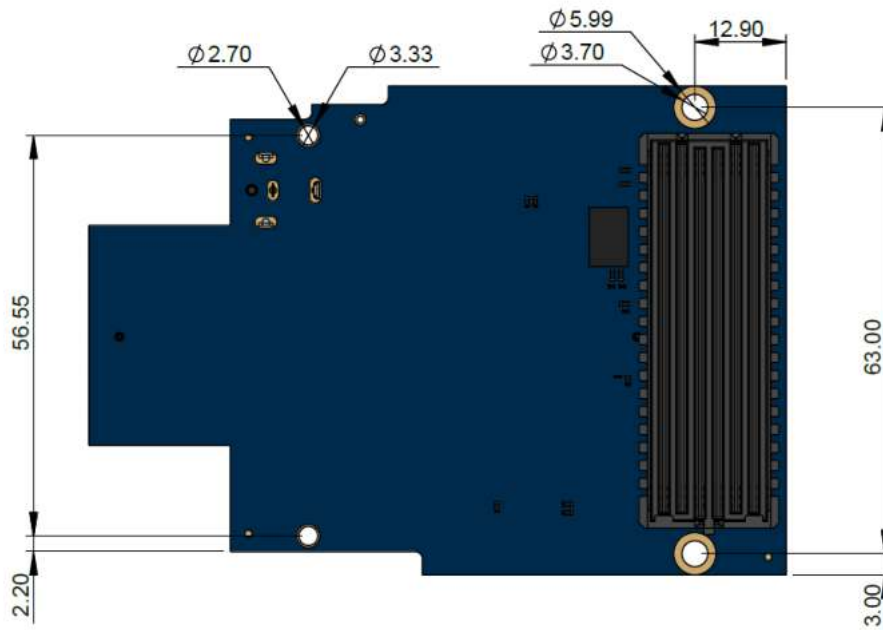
FMC+ PCIe x16 Module Mechanical dimension – Bottom View
